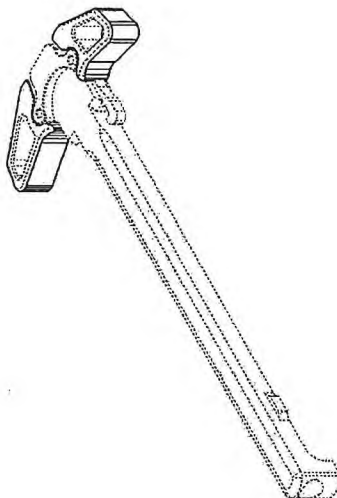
is a back view of the firearm charging handle shown in FIG. 1.
